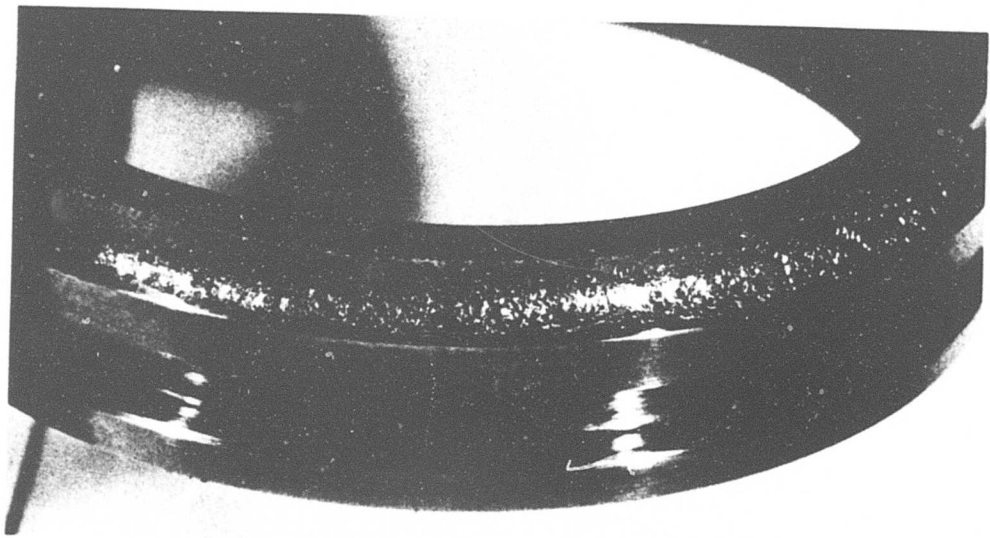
Primary Fatigue Failure on Puller Groove Half Inner-Race Bearing S/N 0009. Slight Split-Line Damage on Plain Inner-Race Segment (Bottom)
